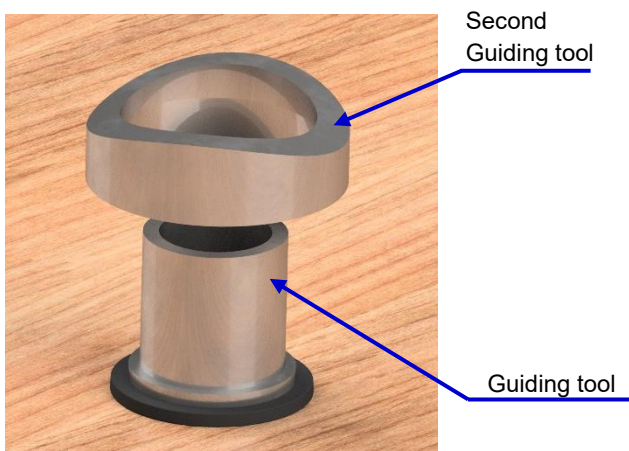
The seal is trapezoidal. Place larger diameter at the bottom.
